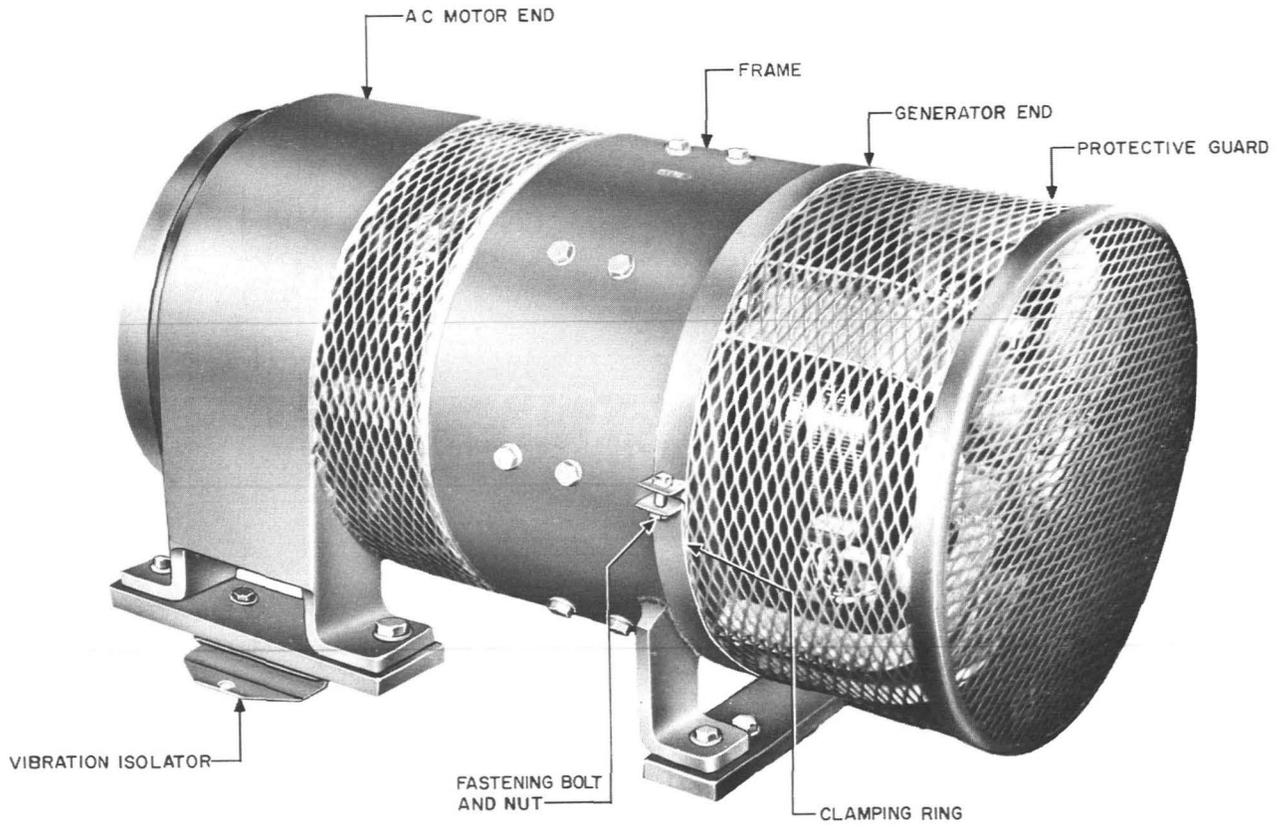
Motor-Generator — KS-15834 L8 Shown
